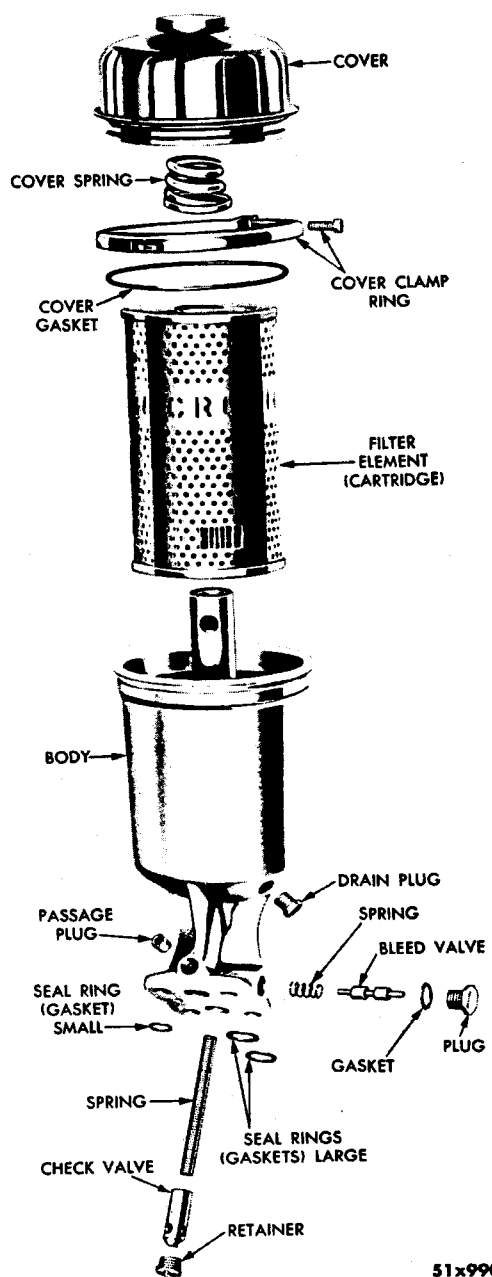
By-Pass Oil Filter Senior Element (Exploded View)
